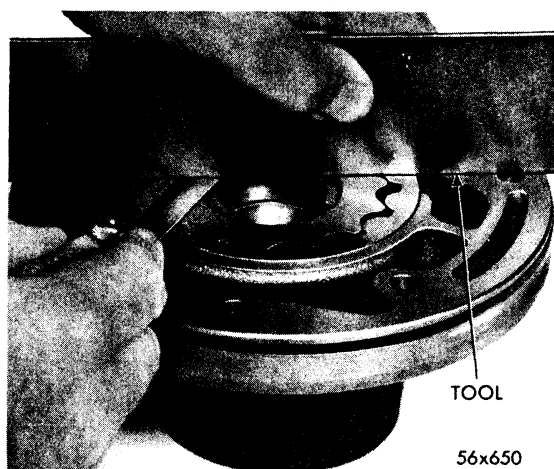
Checking Clearance Between Front Pump Body and Gears
